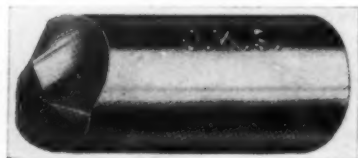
Fig. A. Diamond Tool for turning and boring with diamond brazed in holder.
